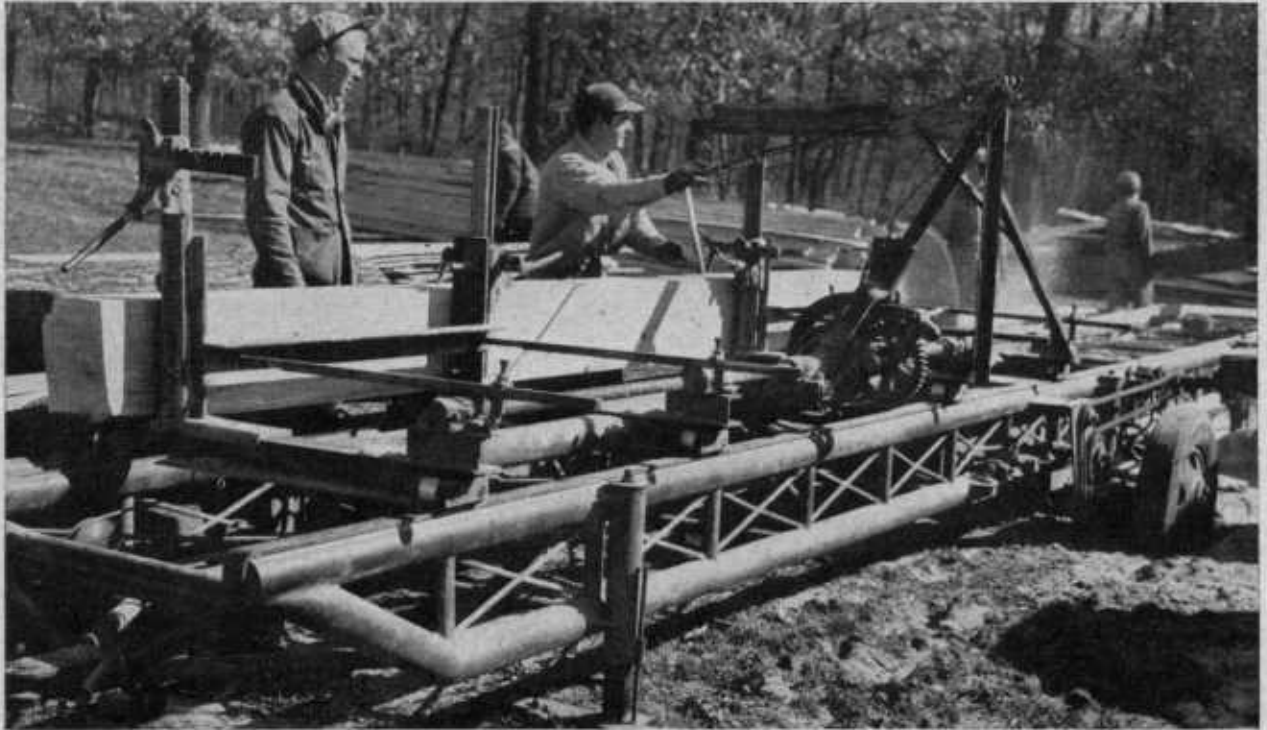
Single-circular, wheel-mounted mill. Sawyer stands on the ground.
